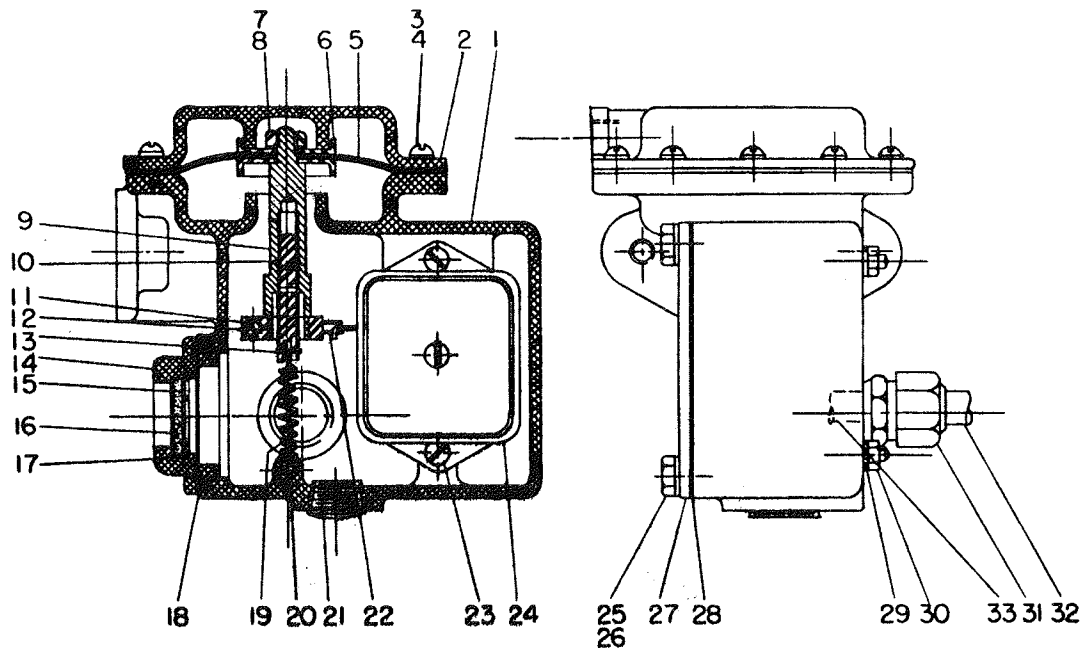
LOW VACUUM SWITCH ASSEMBLY PARTS
